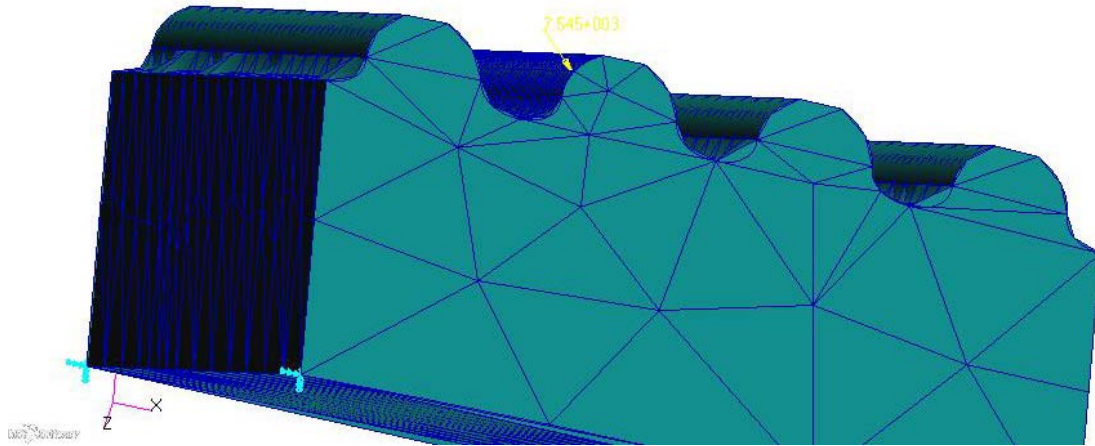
3D model of gearing of a part of a cogwheel of Novikov's tooth gearing
